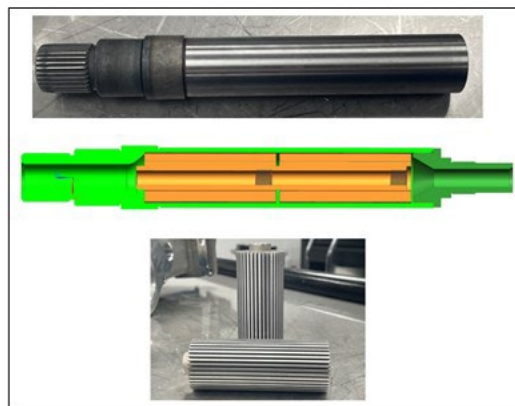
Rotor shaft assembly with oil cooled heat sink inserts
